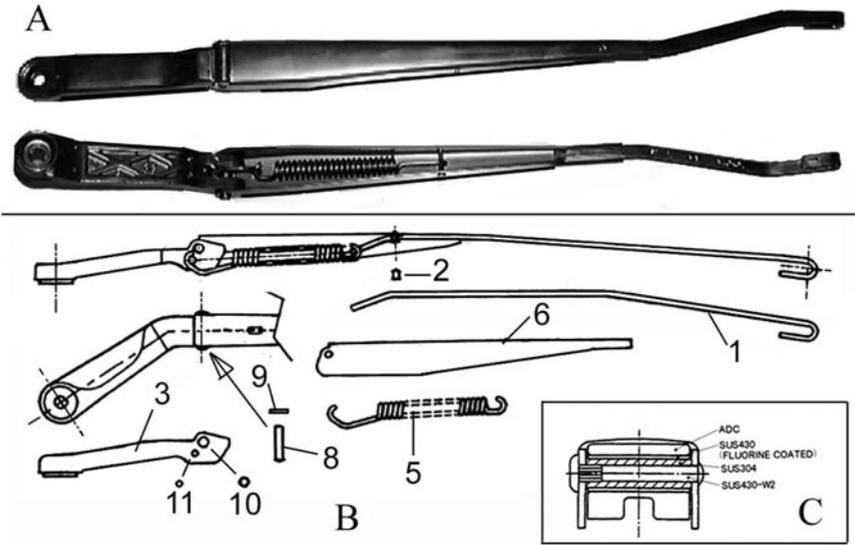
Pictures of a wiper arm (A), a split view of its parts (B) and detail of a joint (C). 1: shaped stick; 2: rivet; 3: clamp; 5: spring; 6: body; 8: main joint; 9: washer; 10: bush; 11: spring pin.
